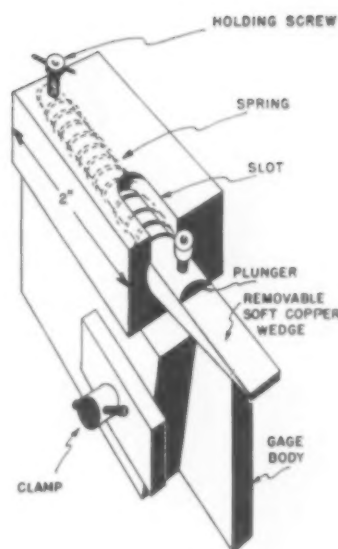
Flange deflection gage used in experimental analysis of axially-split casing design
